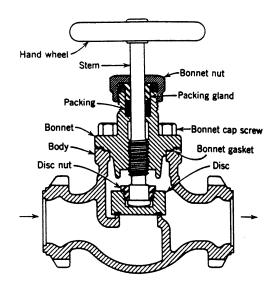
Packed-type manual valve. (Courtesy of Vilter Manufacturing Company.)
